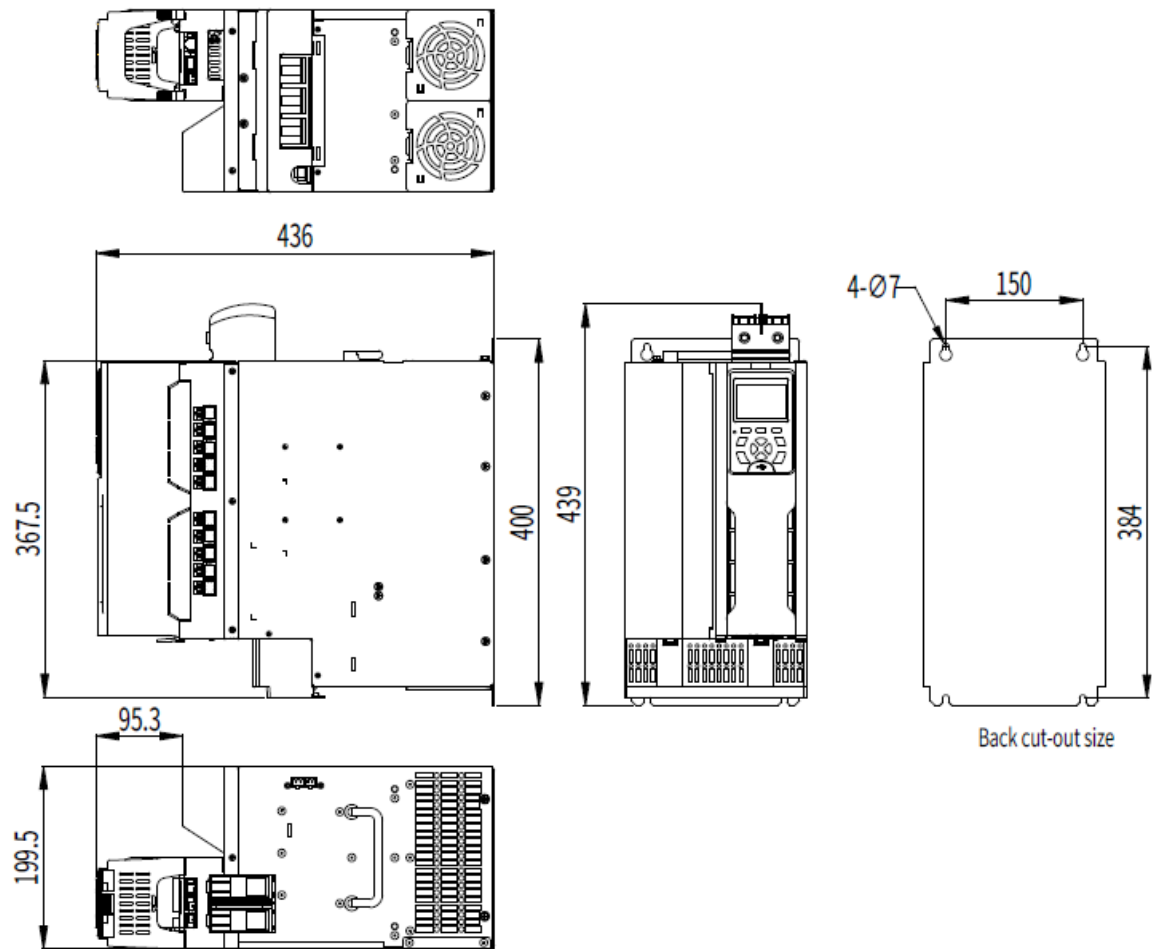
0220–0260 rectifier unit dimensions (unit: mm)
